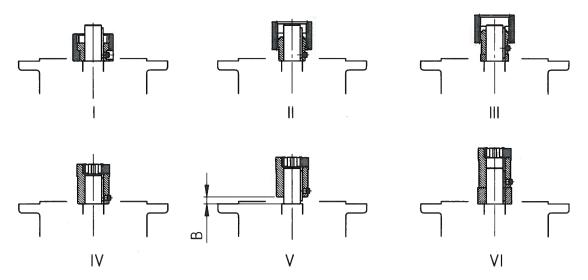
Fitting the coupling onto the motor shaft - various types of coupling
